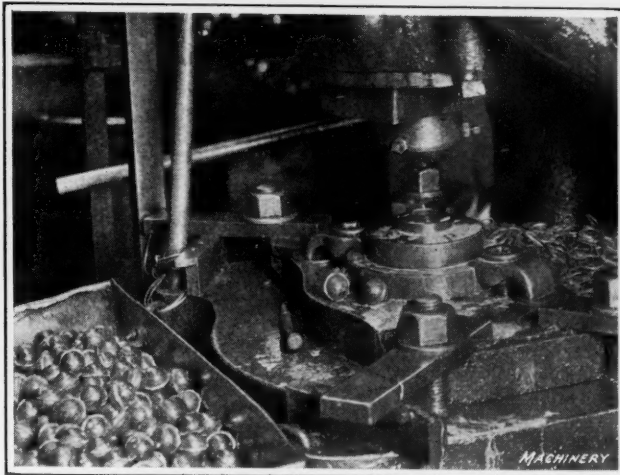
Set-up employed in removing the Flash produced in welding the Balls. Note Pile of Trimmings back of Die
